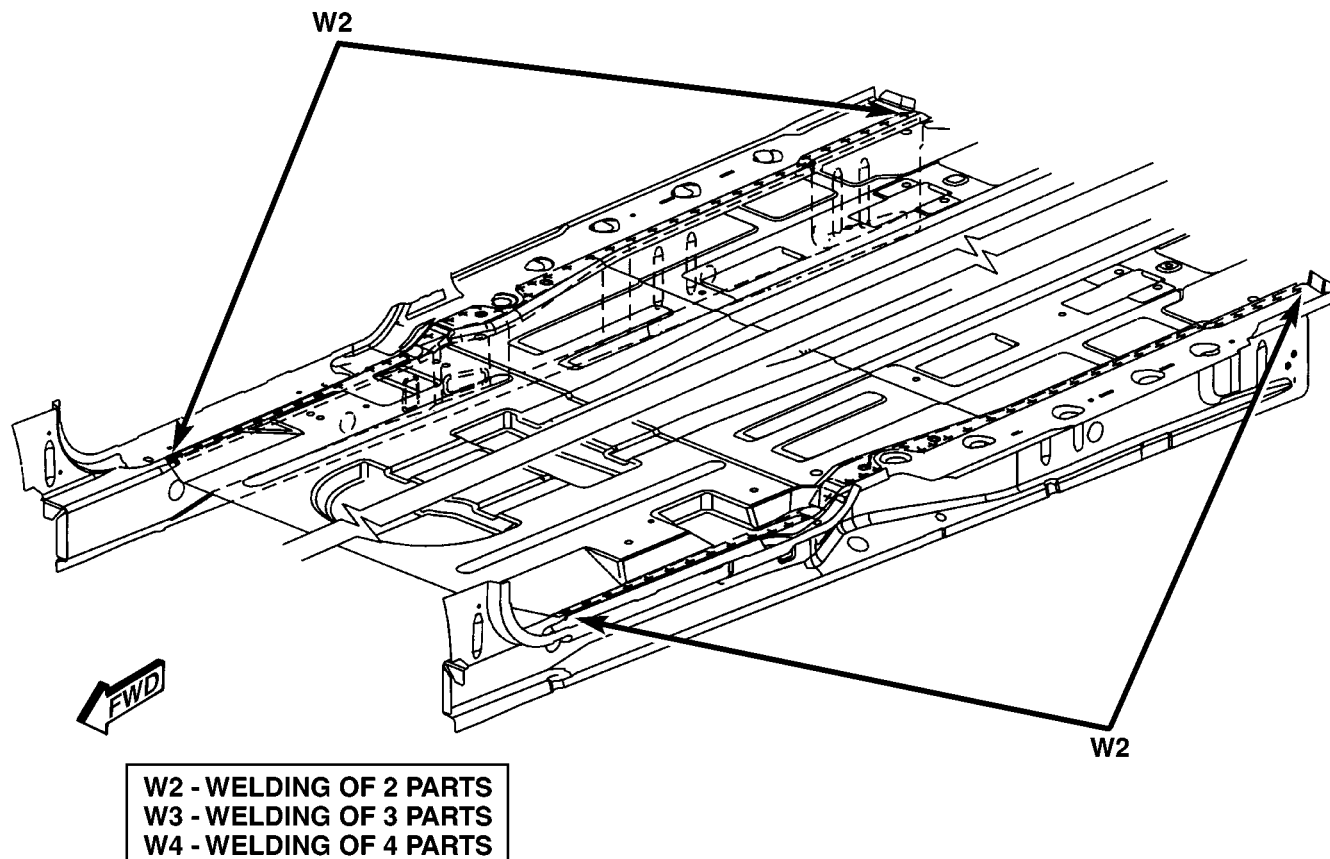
INNER SIDE SILLS - LONG WHEEL BASE ONLY
